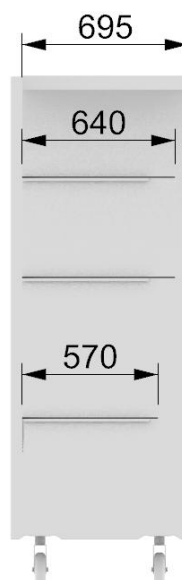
Cargo shelf dimensions front view (in millimetres)
